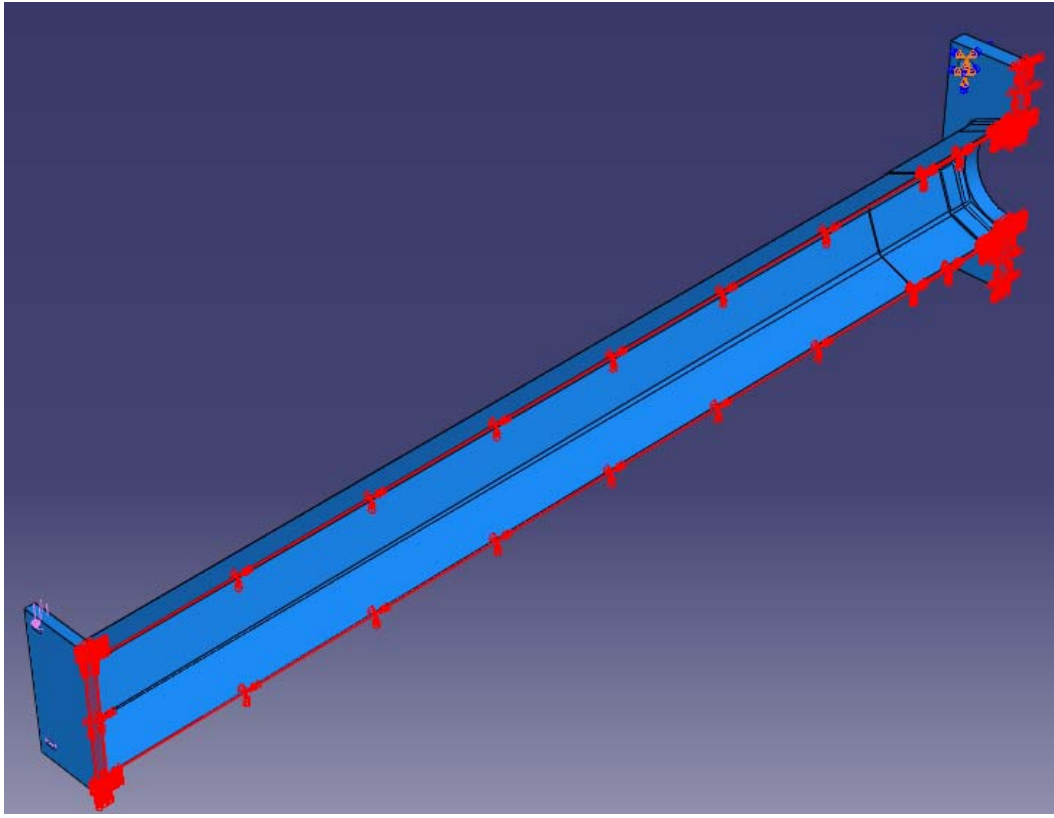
Contact Surface between Pole Shaft and Backing Ring
